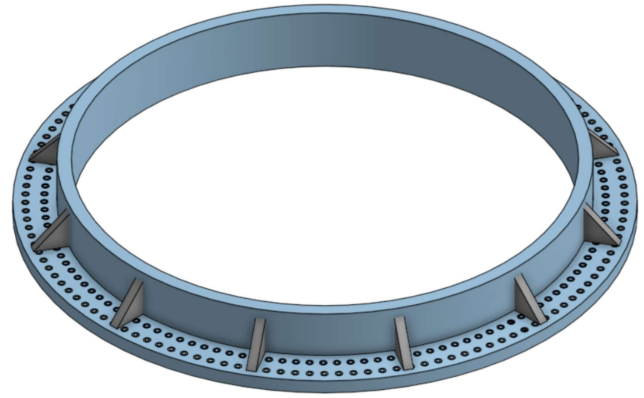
Second Base Plate Design With One Flange and Two Layer of Bolts
